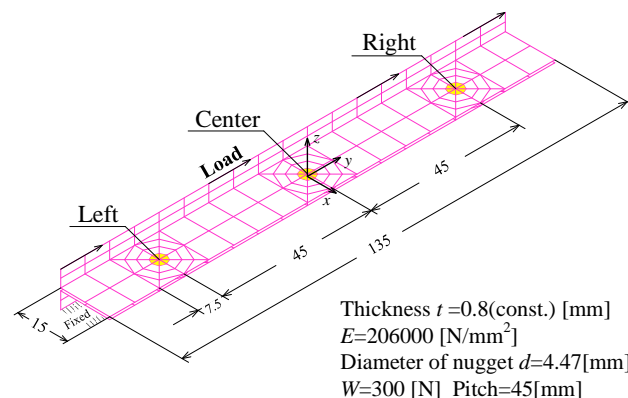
Three spot-welded equal-thickness LL model
